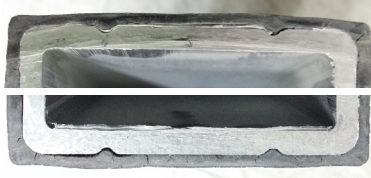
Specimen after fatigue test (Load, 70 kN)
